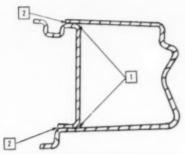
Assembling reinforcement and body side sill panel: 1. fit reinforcement to body side sill panel and 2. weld reinforcement at top and bottom.
